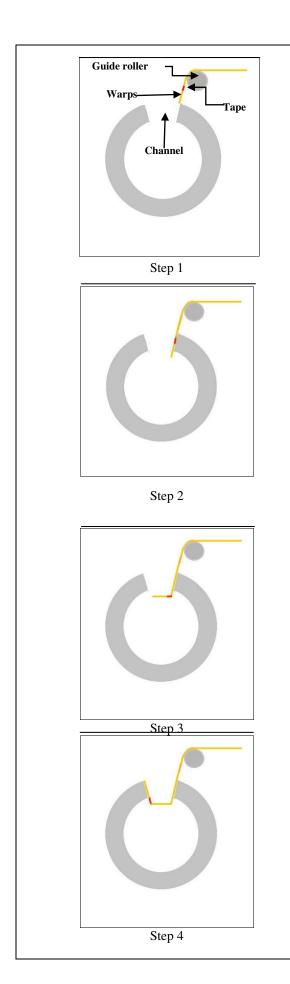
Front view of the beam in the sizing machine according to the proposed technique
